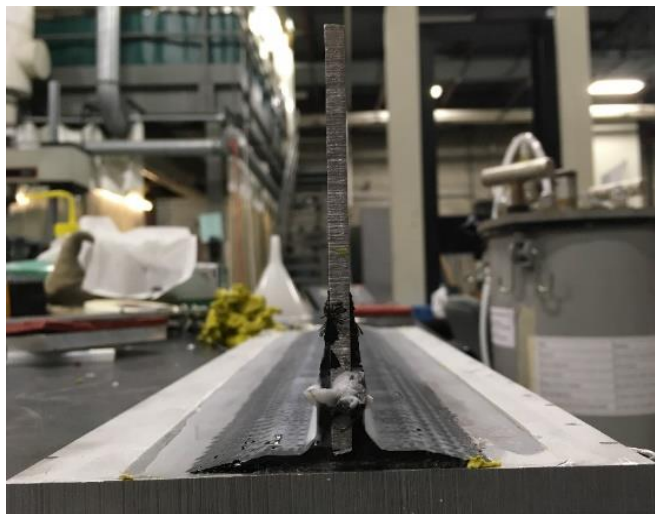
The bulk of Aluminum Pi-joints after curing
